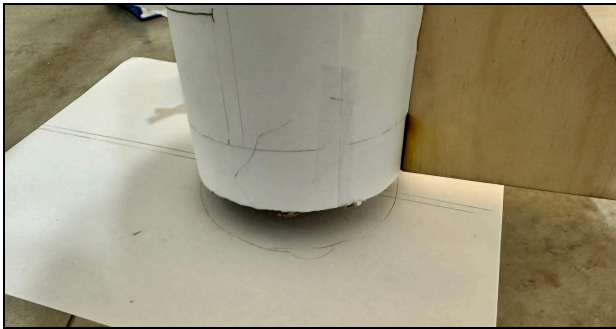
The image shows two of the fins and the body tube outlined on the paper
